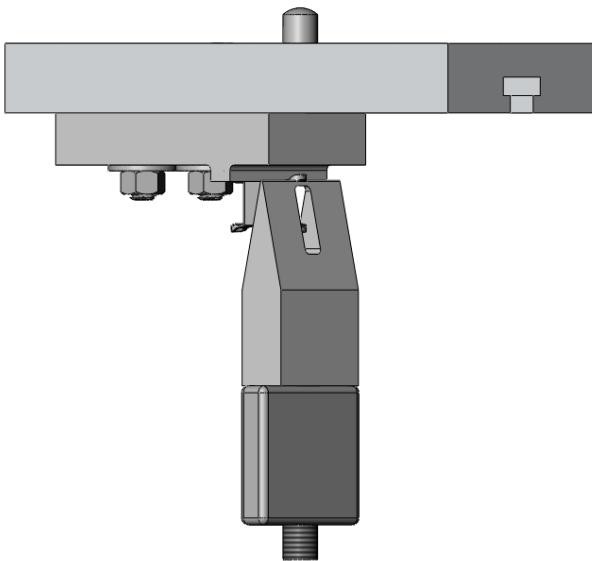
9 Fatigue test setup view rotated 45° clockwise
